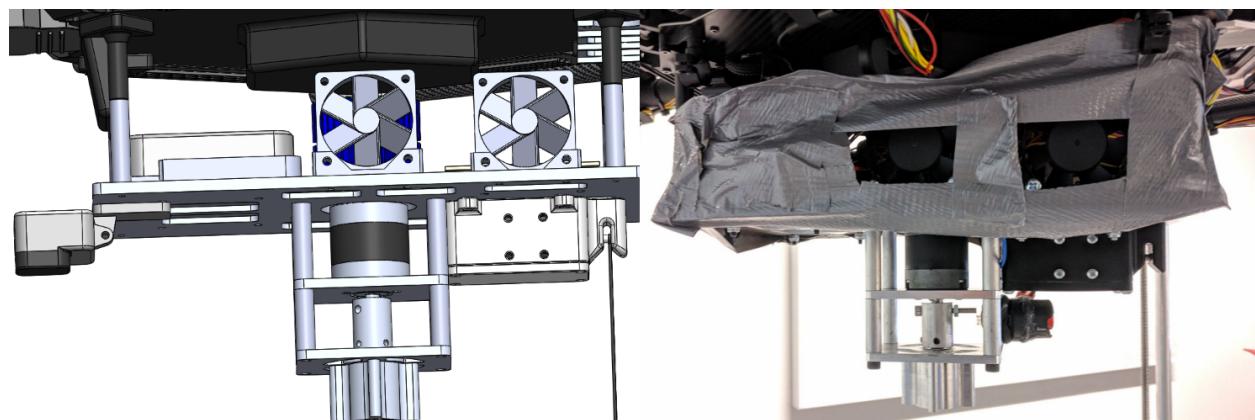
Close up of mounting plate in CAD and real life, with duct tape shielding
